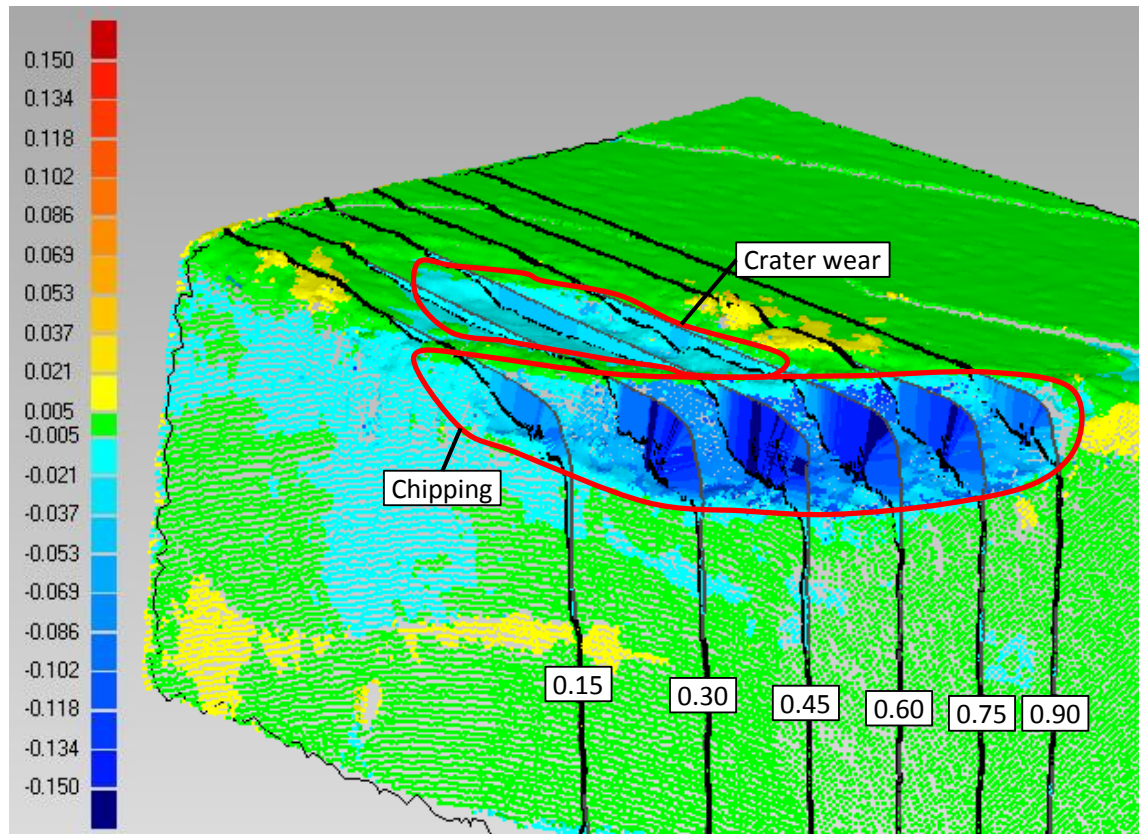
Chipping, crater wear and cross sections parallel to secondary flank face
